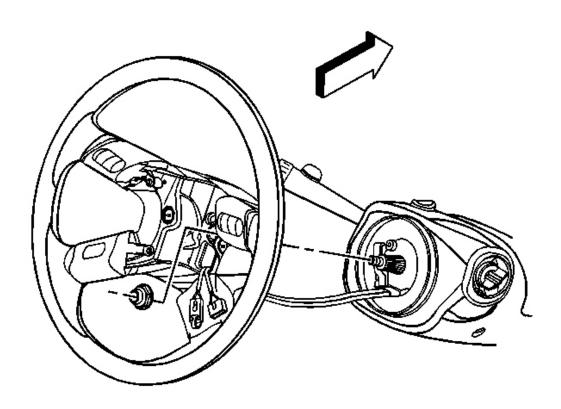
Steering Wheel & Steering Wheel Shaft Courtesy of GENERAL MOTORS CORP.
